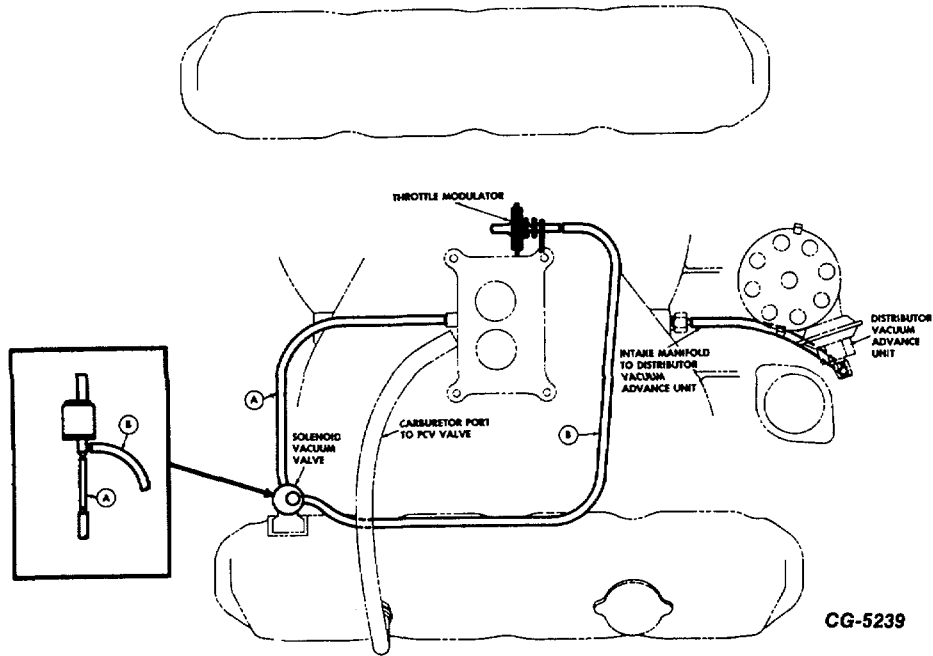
Vacuum Hose Locations on MV-404 Engine With 2210C Carburetor in Cargostar and S-Series Vehicles (Sold in Canada)
